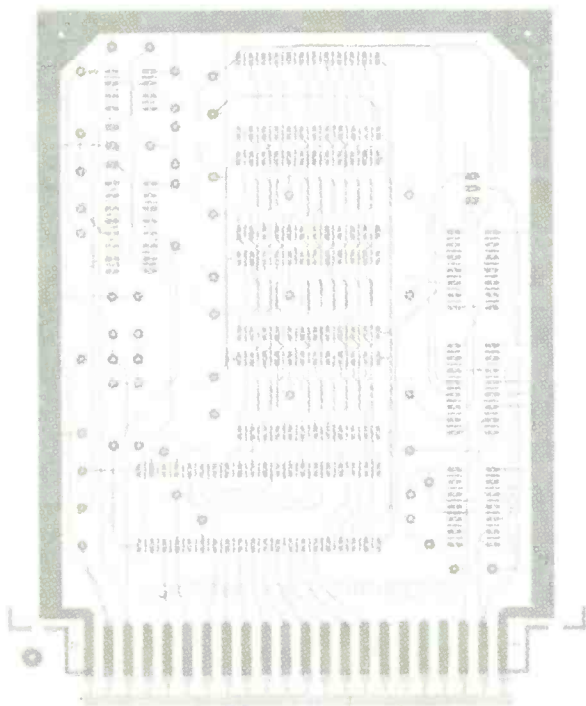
PARTS LAYOUT: Note that six jumpers must be installed on the component side of the board before installing the IC sockets. (Sockets mount over five of the six jumpers.)
